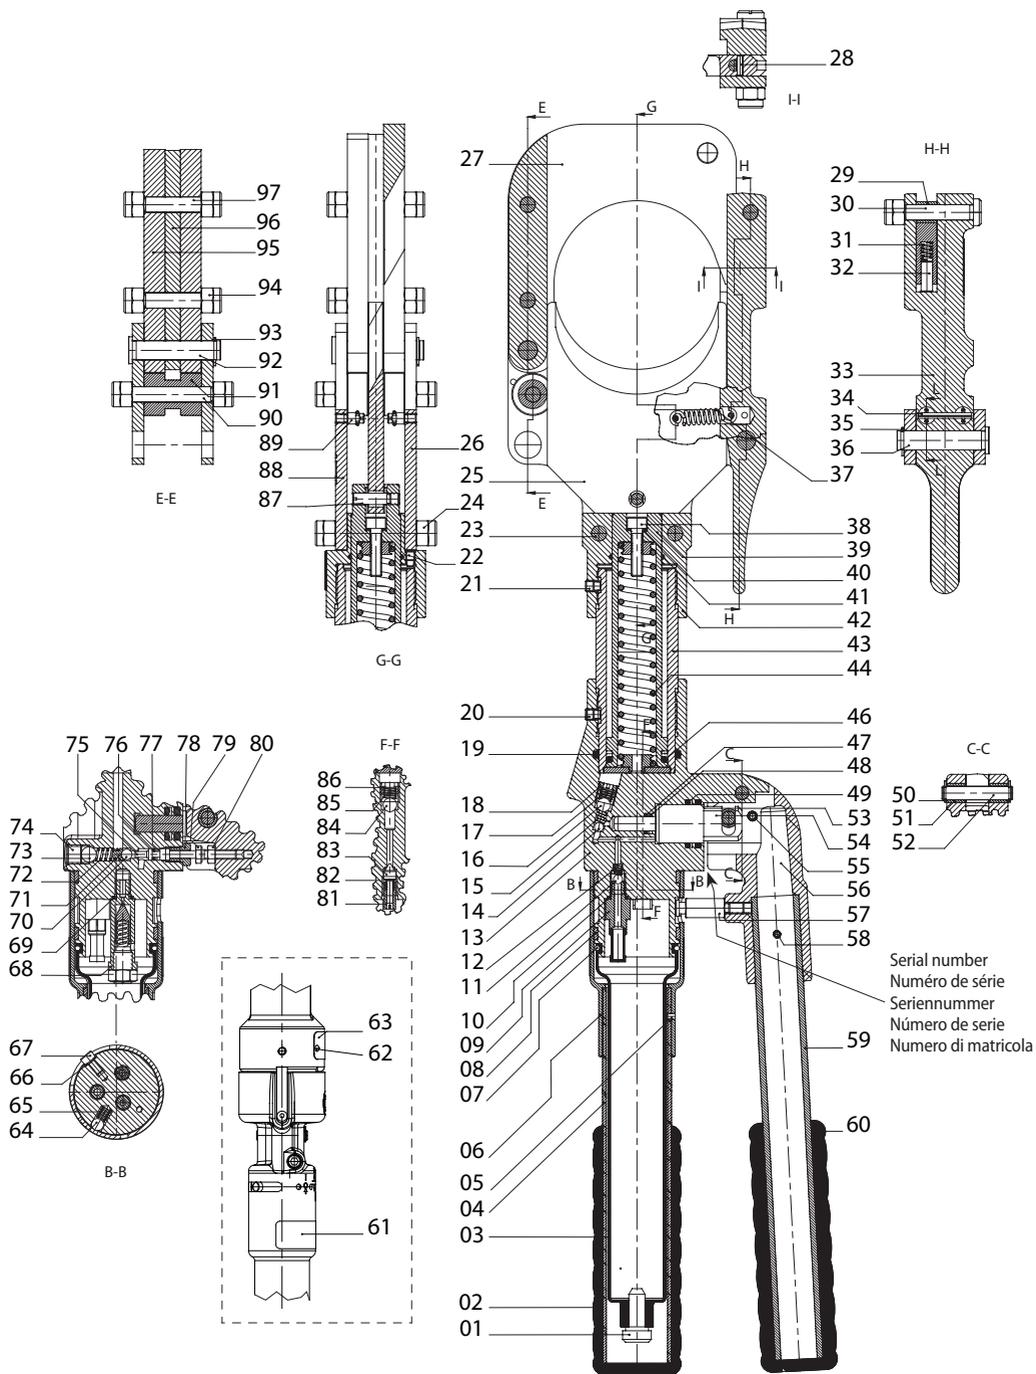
LONGITUDINAL SECTION - COUPE LONGITUDINALE - SECCIÓN LONGITUDINAL
